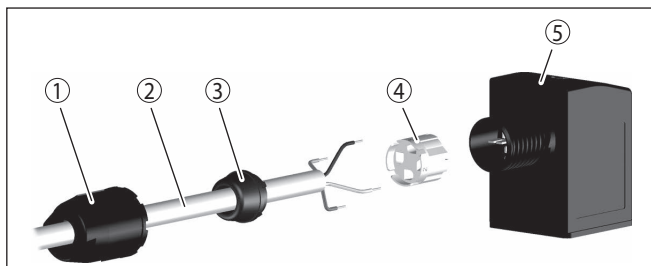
Connection, valve plug ISO 4400 with IDC crimping technology
